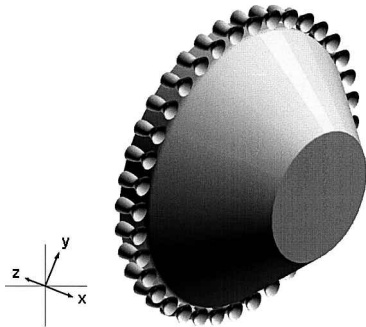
Principle design of plug nozzles, clustered plug, 36 modules, with truncated plug body.
